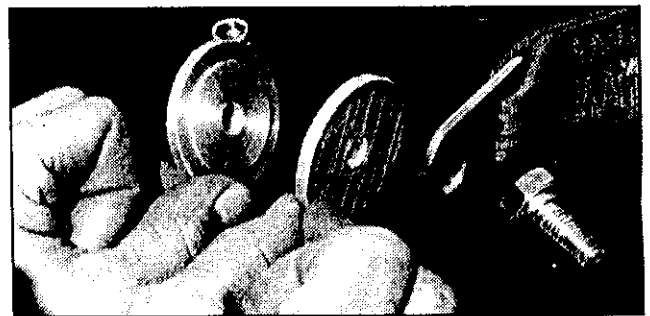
PARTS OF THE SEAT BELT ASSEMBLY
